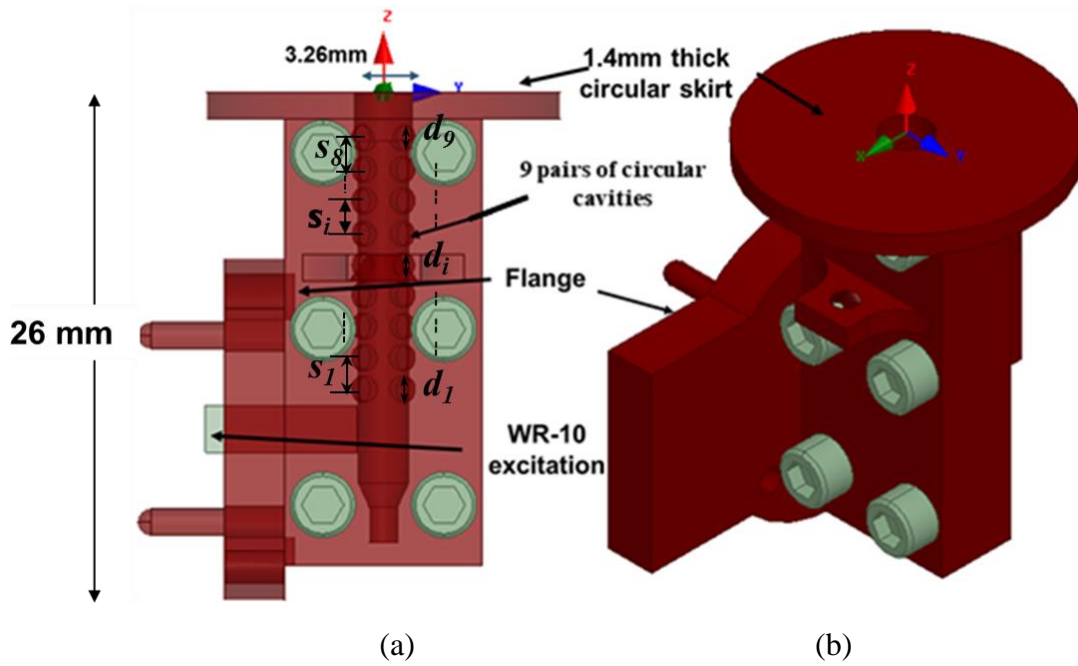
Final optimized modified design with circular skirt (a) Front view, and (b) Isometric view.
